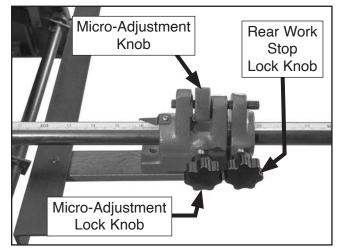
Location of rear stop work lock knob and micro-adjustment lock knob.
